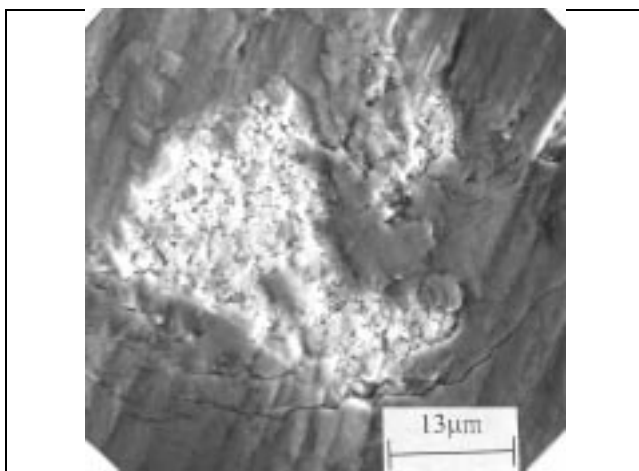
Flank wear of single layer coated insert is flake and cracks fracture
